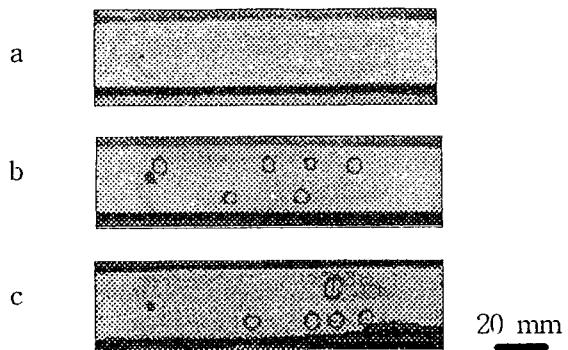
Transverse welding cracks of IN738 weldment as a function of heat input:
